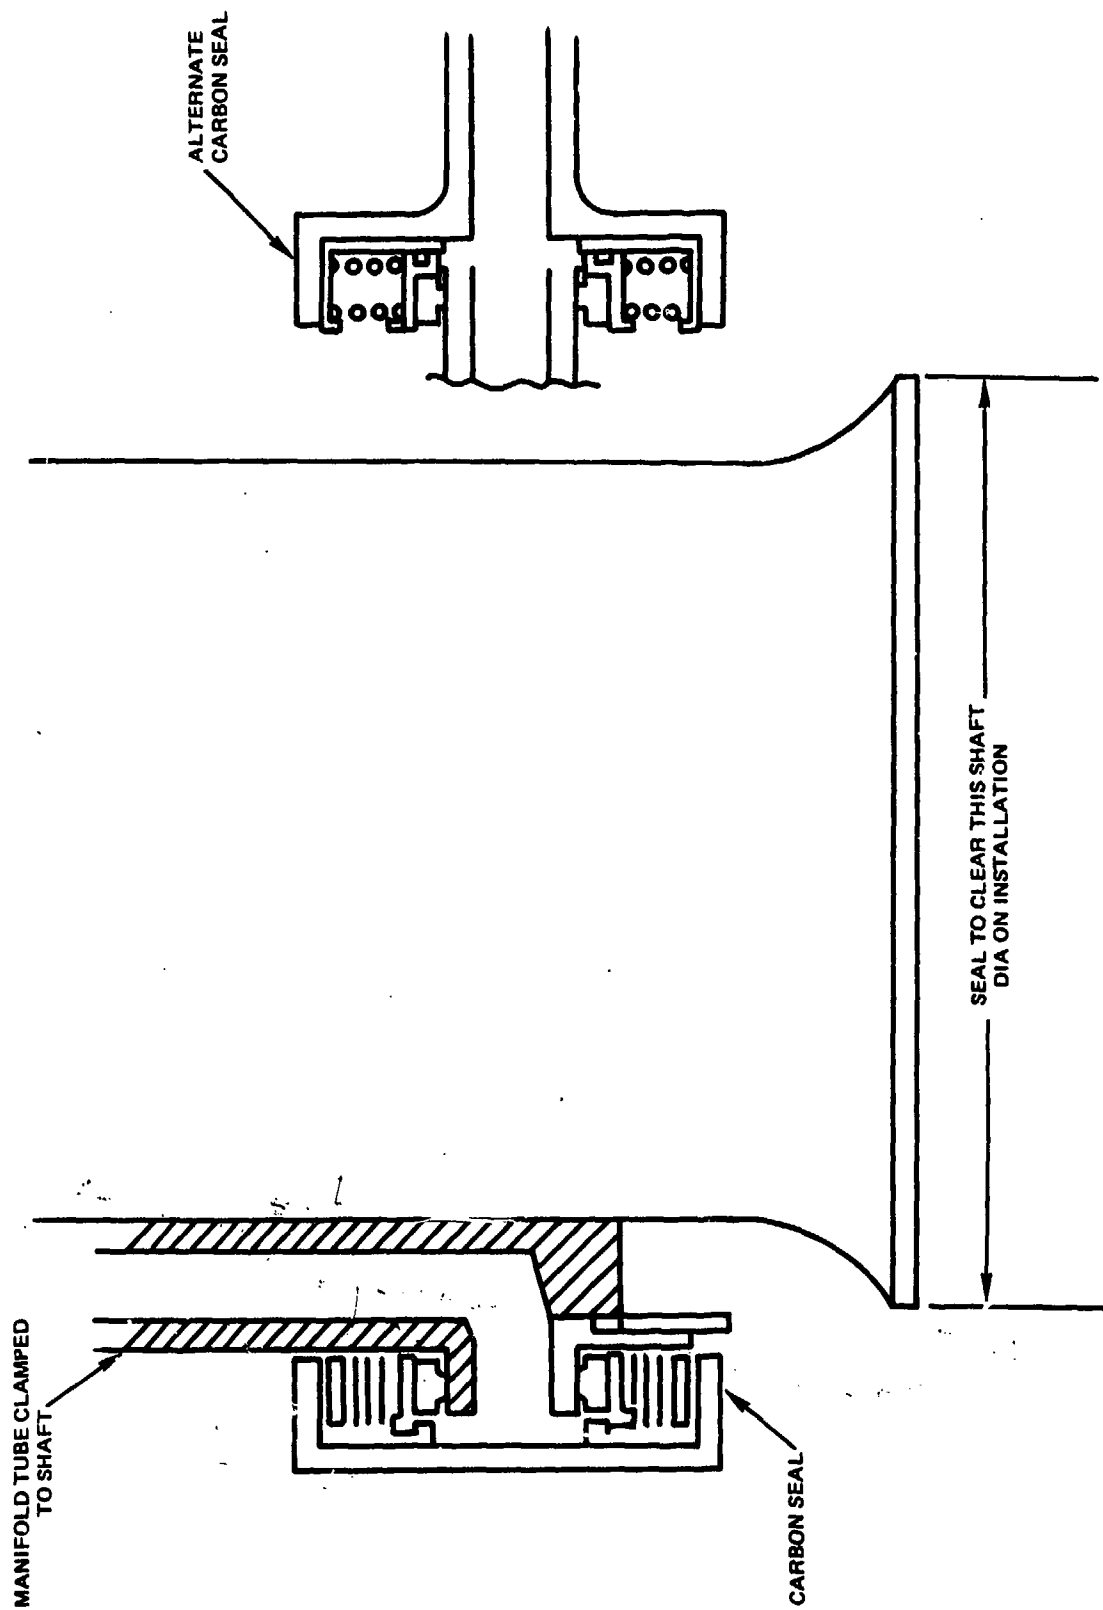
Liquid Rotary Seal for Water-Glycol Rotor Blade Anti-Icing.
